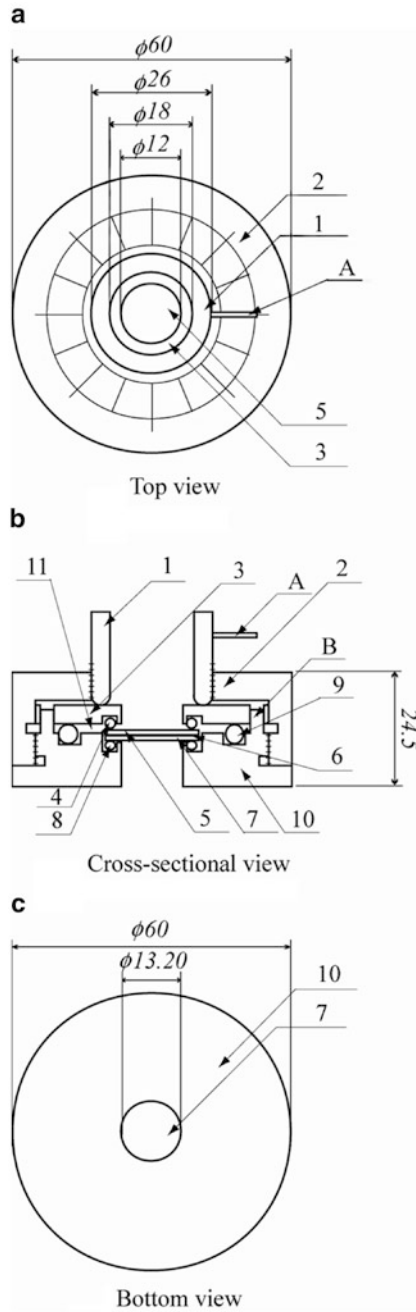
Block diagram of the optical cell: top (a), cross-sectional (b), and bottom (c) views. 1, cylindrical screw; 2, stainless-steel cap; 3, stainless-steel cover; 4, 8, and 9, fluoride-rubber O-rings; 5 and 7, CaF_2 discs; 6, Teflon spacer; 10, stainless-steel bottom block; 11, space for overflow; A, needle; B, disc stopper. Linear dimensions in italics are expressed in millimeters (Adapted from Ref. 38).
